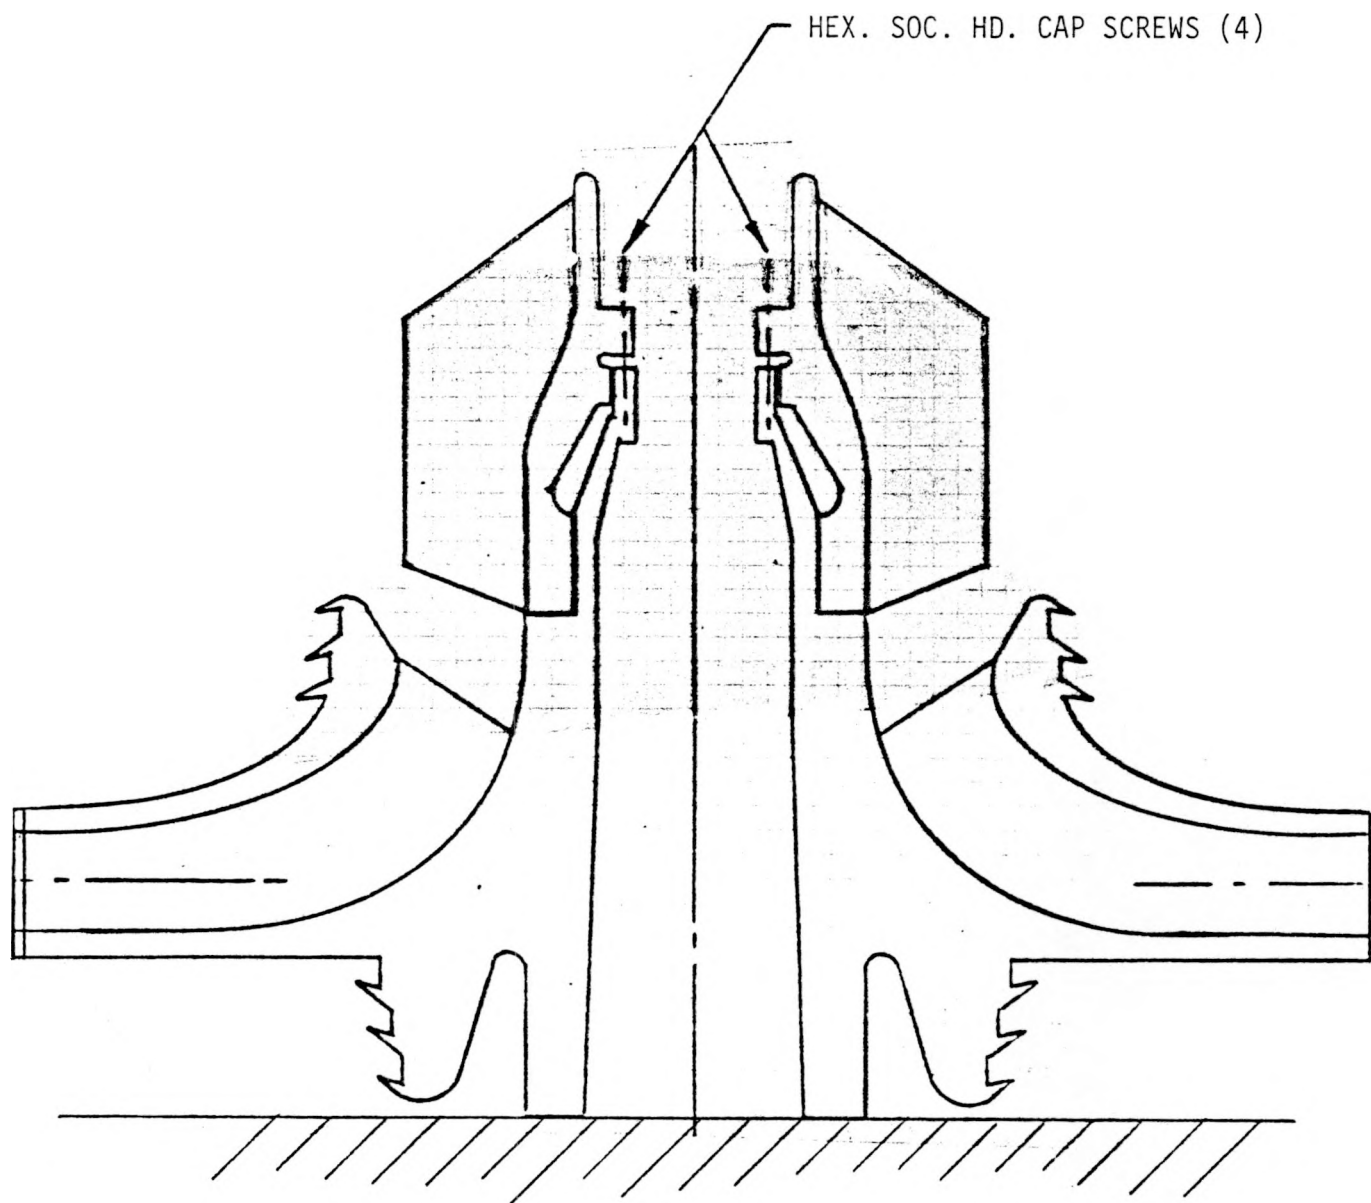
Inducer/Impeller Assembly with Hex Socket Head Cap Screws
